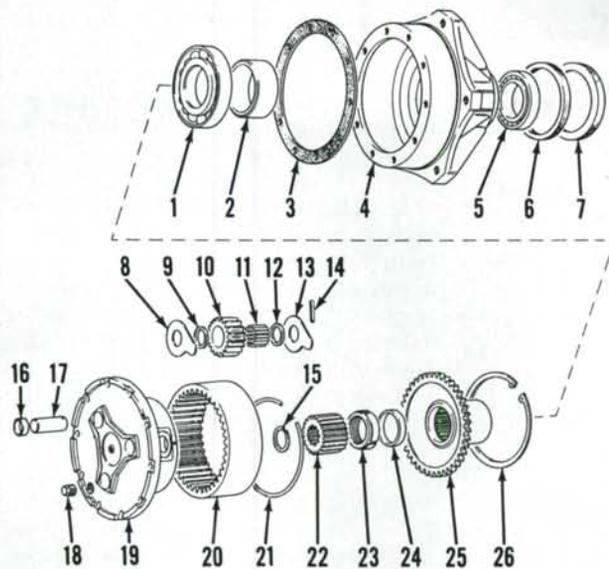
Exploded view of Carraro front drive axle final drive assembly used on 1290, 1294, 1390 and 1490 models and early 1394, 1494 and 1594 models showing component parts and their relative positions
